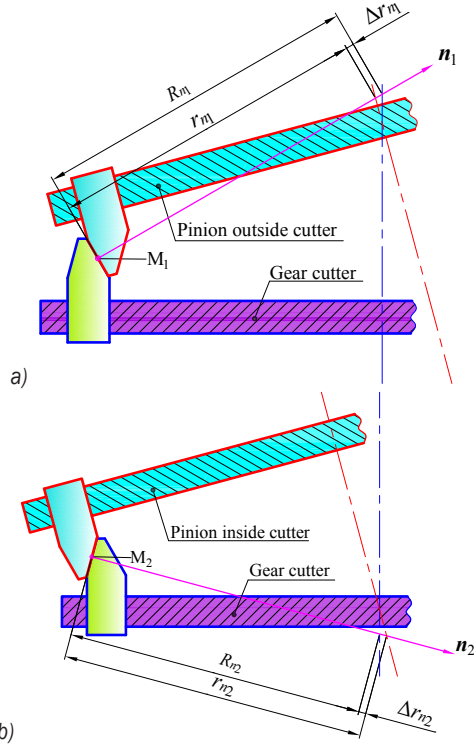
Relative position of gear and pinion cutters in duplex helical method; a) drive side and b) coast side
